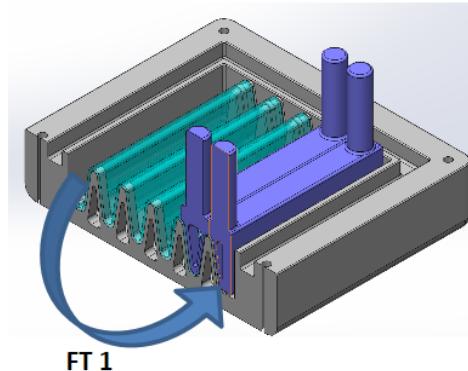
Filter Tool 1 Removal & Insert into 6th slot
